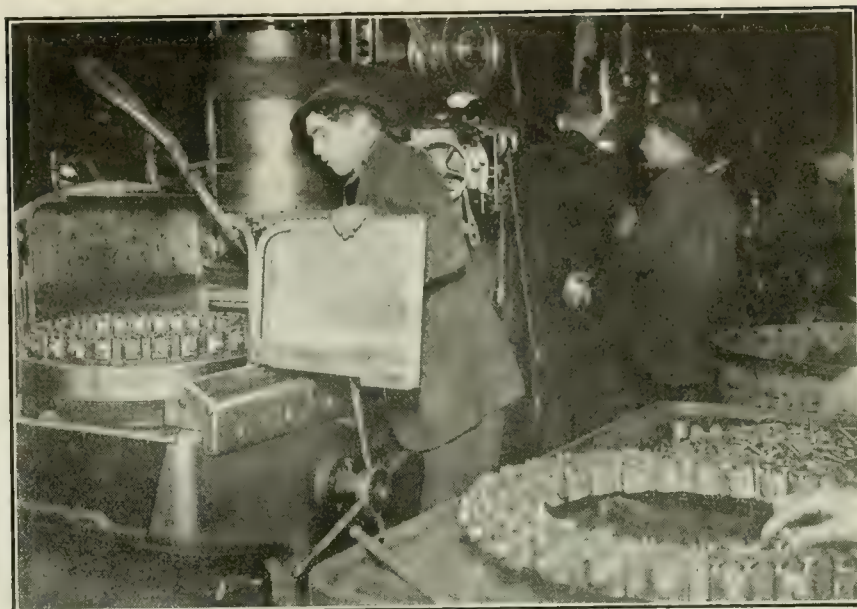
GRINDING AUTOMOBILE PUSH RODS.
